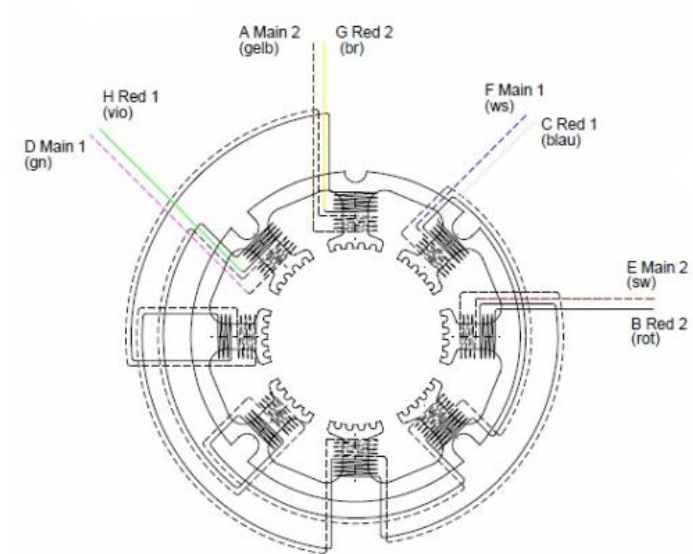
Motor main and redundant windings – Winding Schema [RD06]
